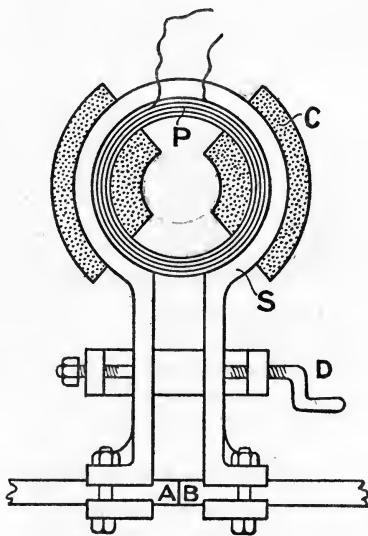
Transformer for welding by means of alternating current.
